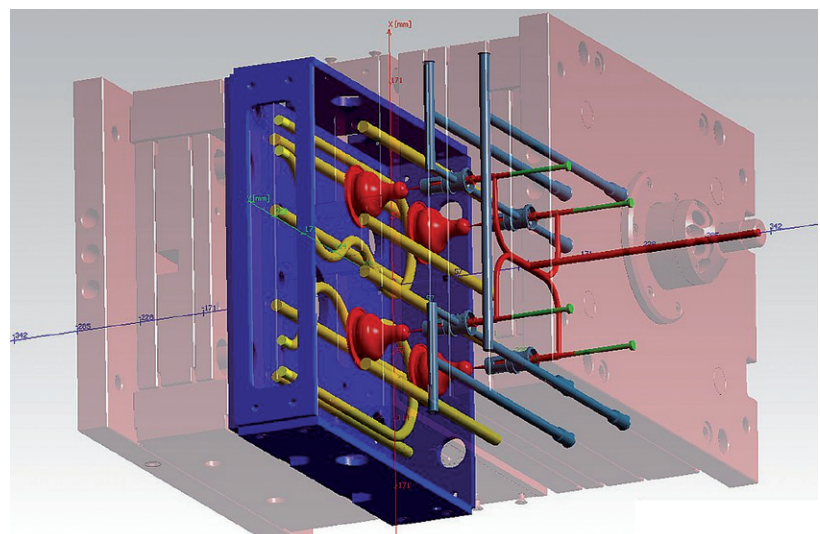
The complete mold configuration, including the cold runner system, is used for the optimization.
